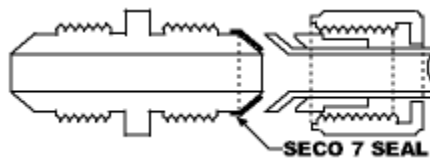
TYPICAL SECO SEAL INSTALLATION
